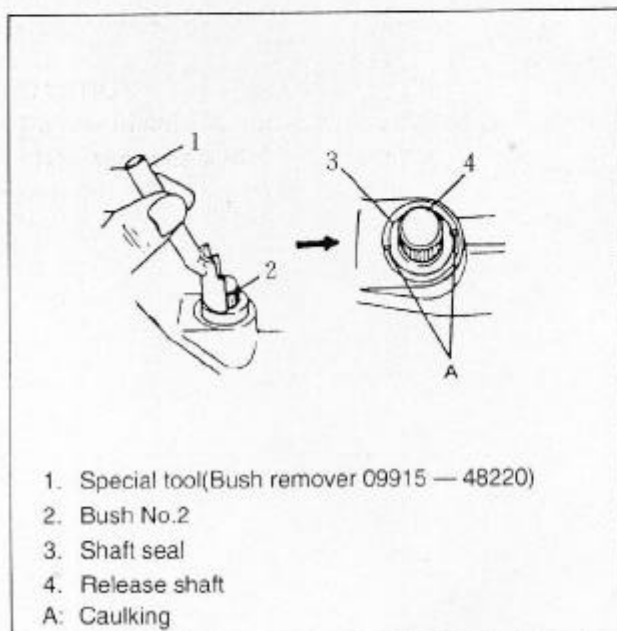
B — 15 INSTALLING BUSH NO.2 AND SHAFT SEAL
